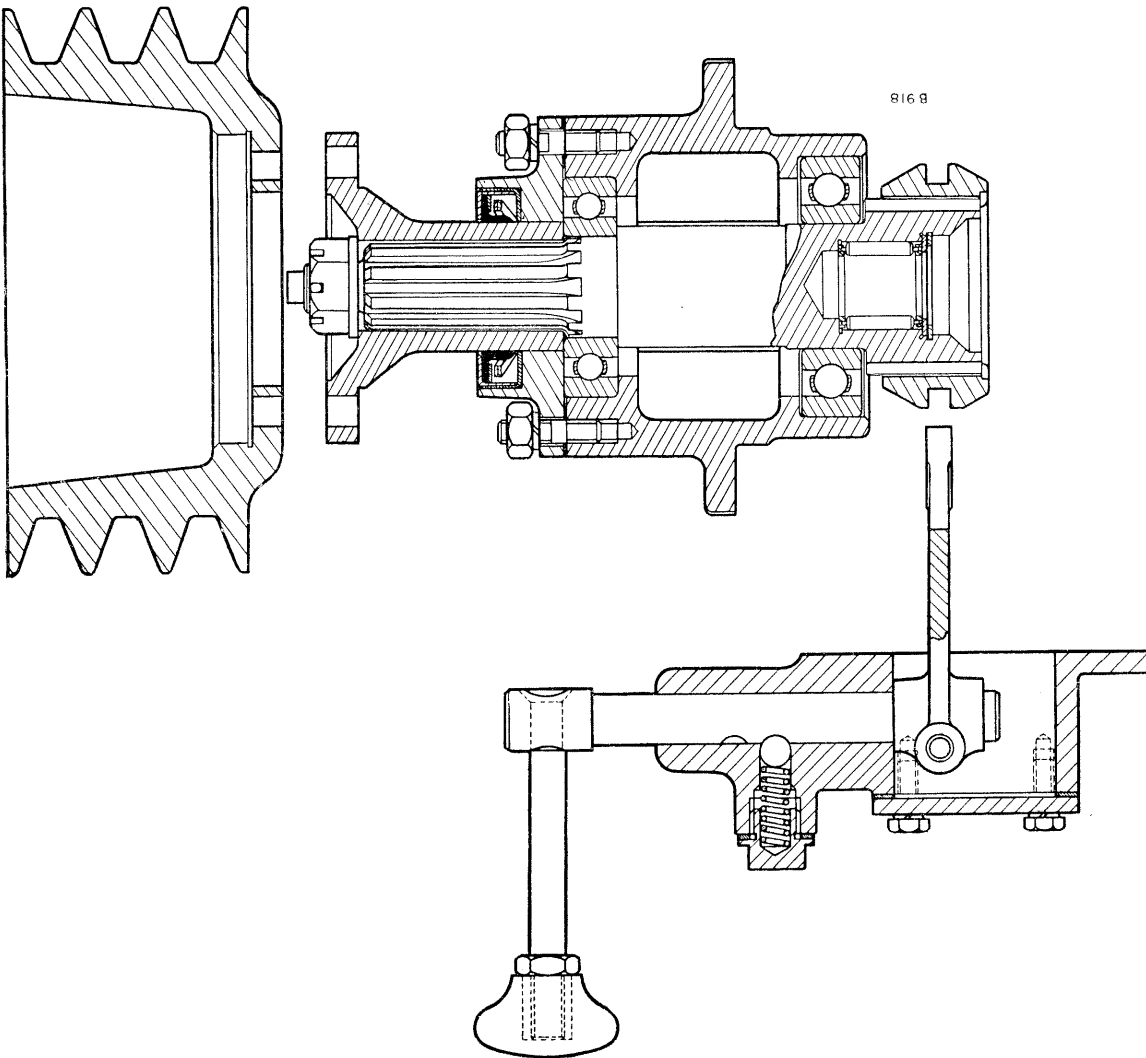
Cross-section of gearbox drive unit and centre pulley, (early type illustrated)
